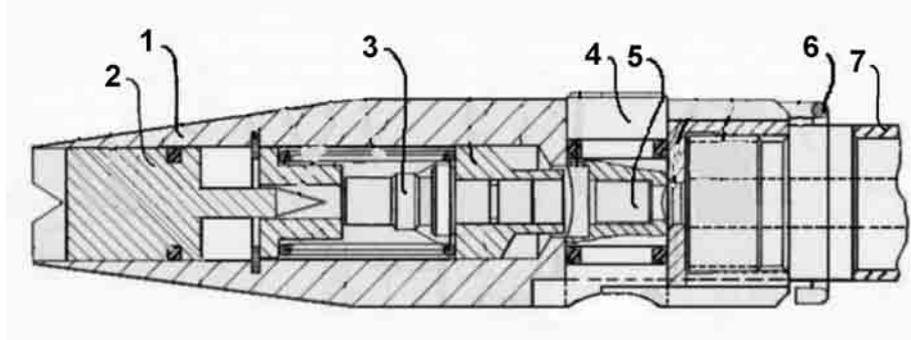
Fuse Head Assembly of Penthrite Projectile (longitudinal section view).
